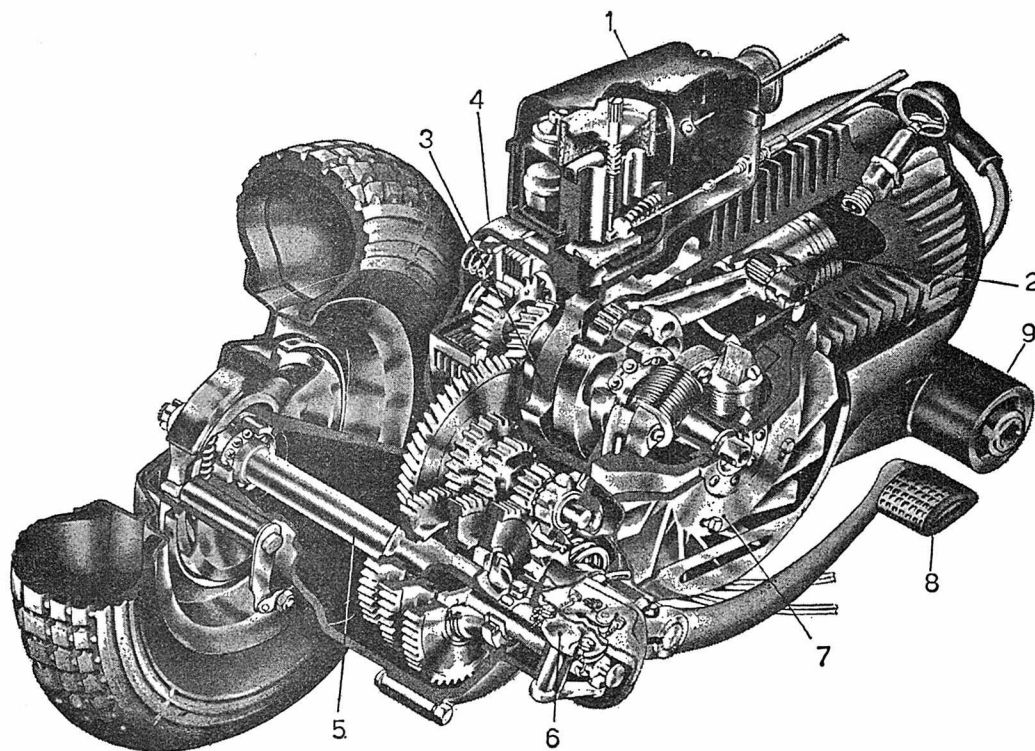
Sectional view power plant which has a rotary inlet valve integral with the crankshaft.
